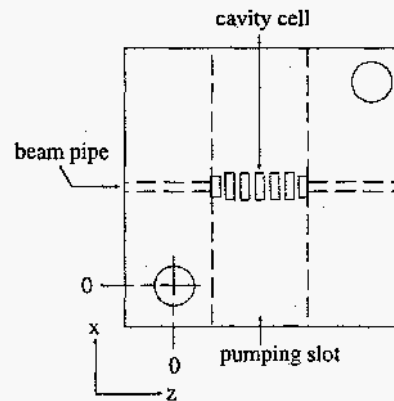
The schematic sketch of test piece. The reference zero is the center of the pin hole at the bottom left corner.
